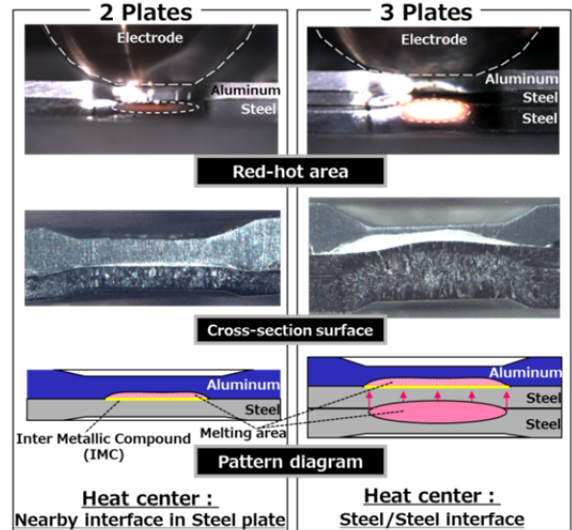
Schematic View of Steel/Aluminum Resistance Spot Welding Process
